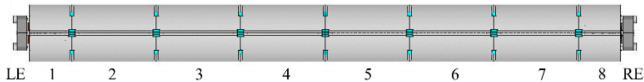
3D view of the MQXFA magnets, with shell segments 1 to 8, from lead end (LE, left) to return end (RE, right).
